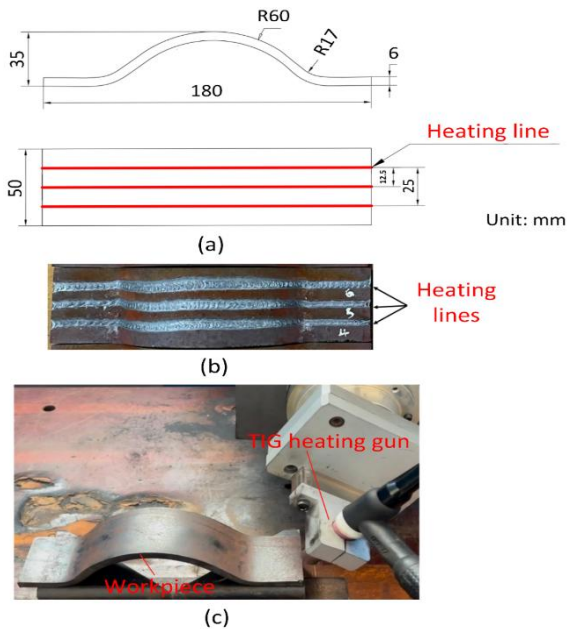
Steel sample and arc quenching technique: (a) S45C steel shape with convex surface, (b) Hardening surface, and (c) arc quenching machine with TIG gun and CNC machine
